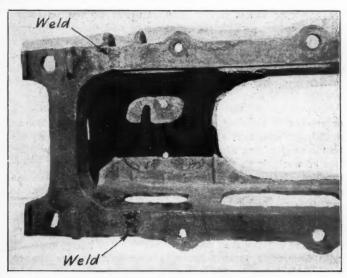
Cracks Welded in Car Truck Bolster.
